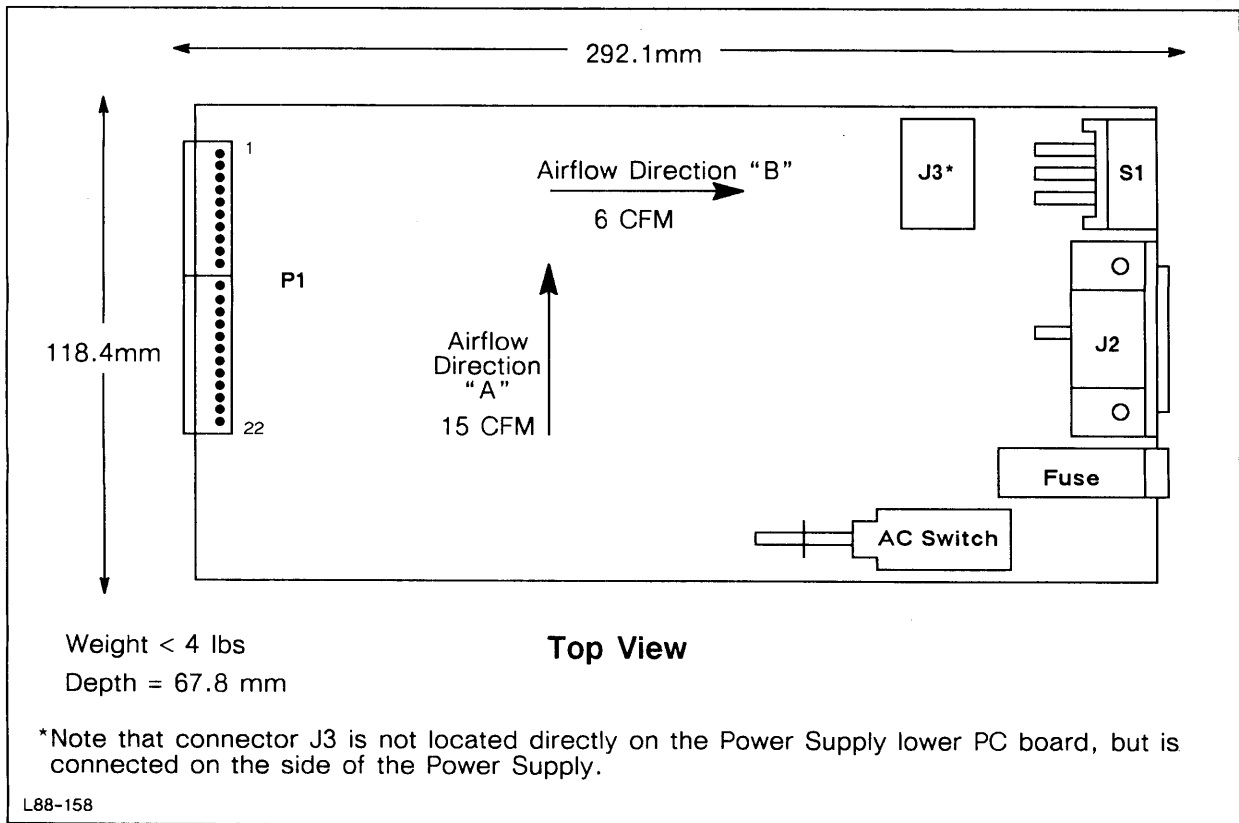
160-Watt Power Supply Dimensions and Connector Locations
